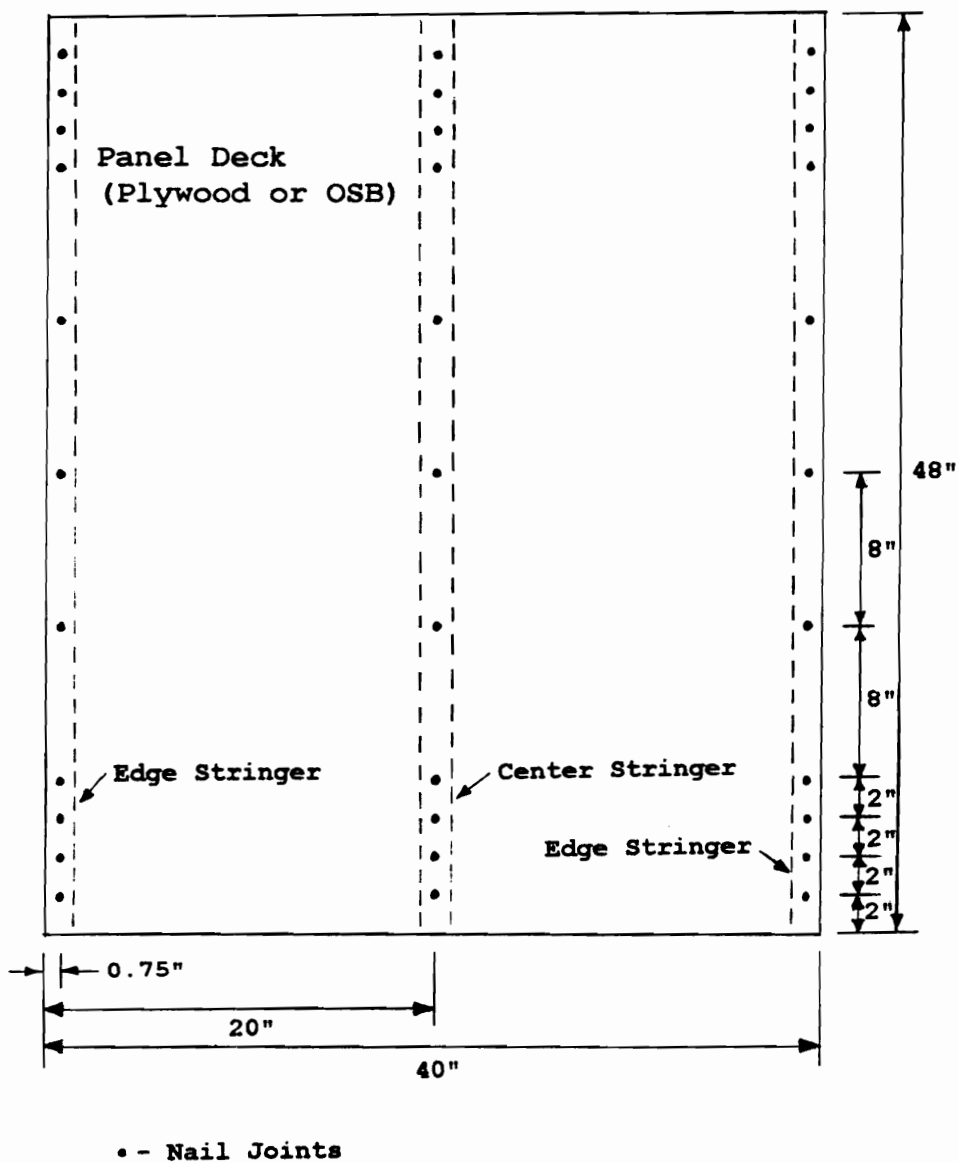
Nailing Pattern used to attach Panel Decks to Stringers in Pallet Assembly.
